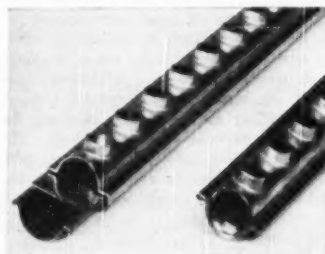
COPPER STRIP USED FOR BRAZING TWO STAMPINGS
